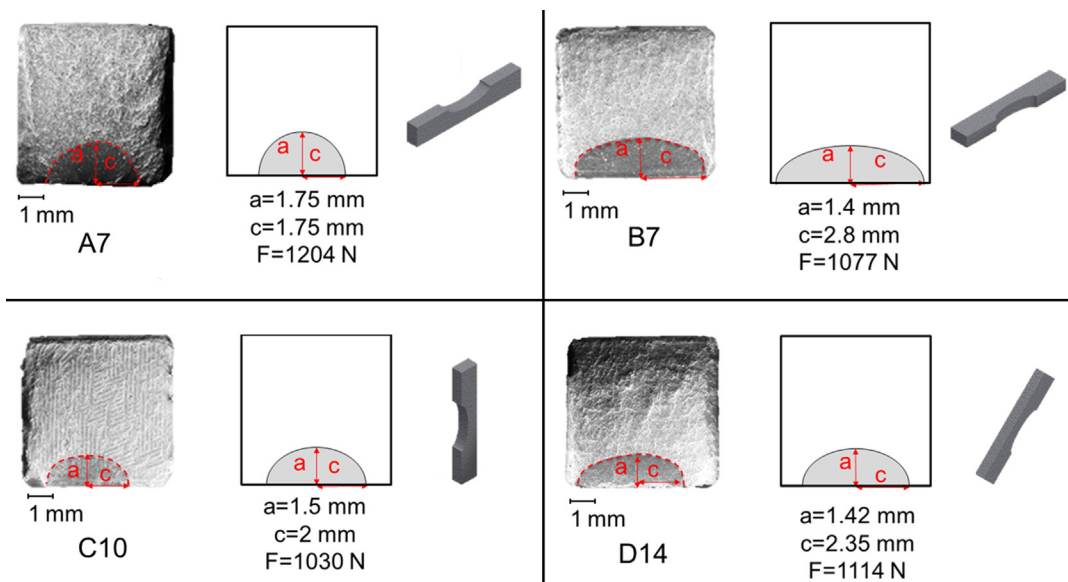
Fracture surfaces, crack geometries and failure loads of the modelled 3 PB specimens.
